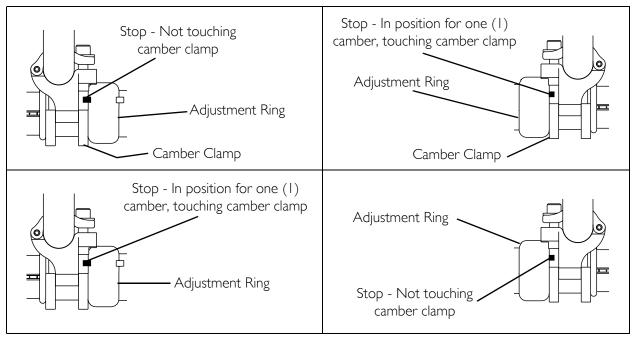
Adjusting Toe In/Toe Out - A4 Camber System - Course Adjustment.
